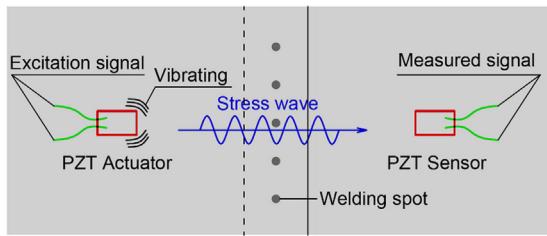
Schematic of using SAM to inspect a spot weld specimen.
